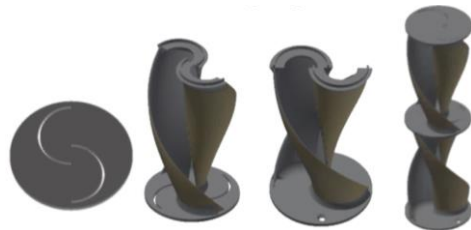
Assembly of the structure of the Savonius turbine with its 2 stages, helical blades and no shaft.
